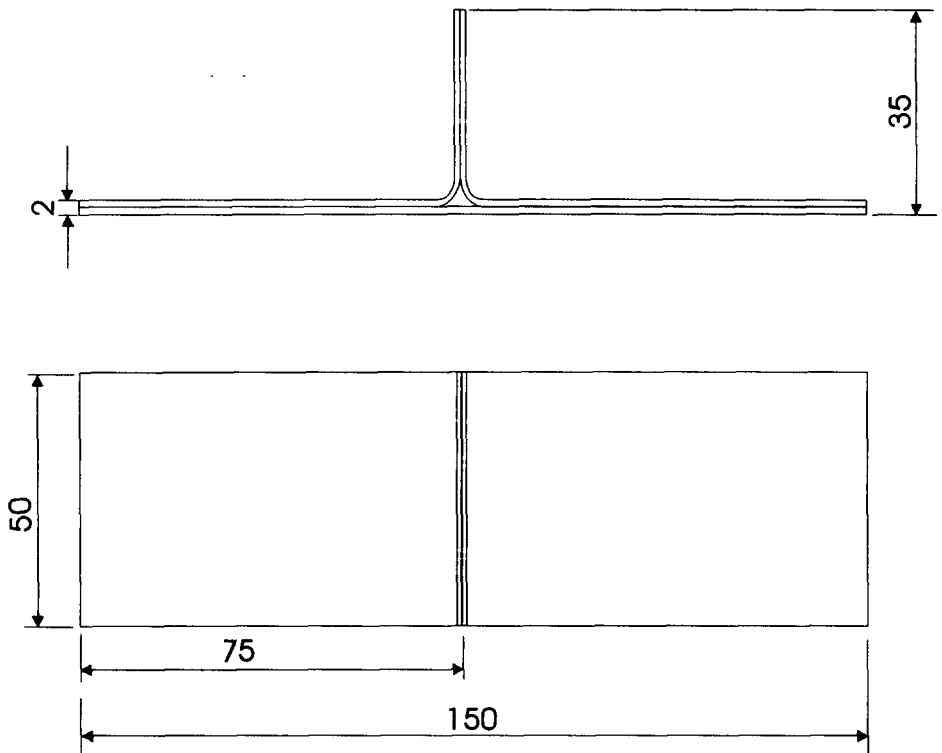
The Dimension of a CFRP Tee-Coupon in mm
